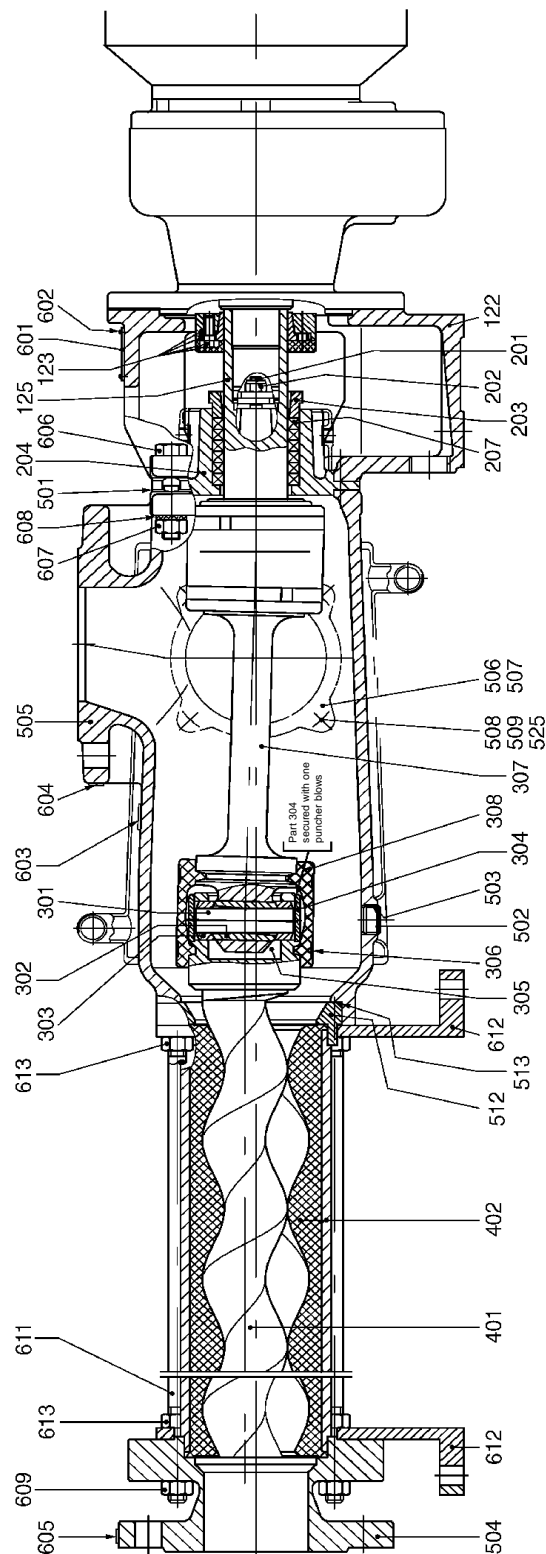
Sectional drawings of series AEB.H; IE construction type
